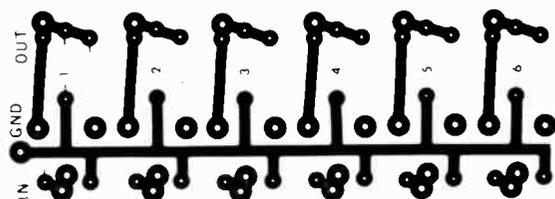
Components for attenuator can be mounted on board similar to that at left. Only four sections are used in this case.
